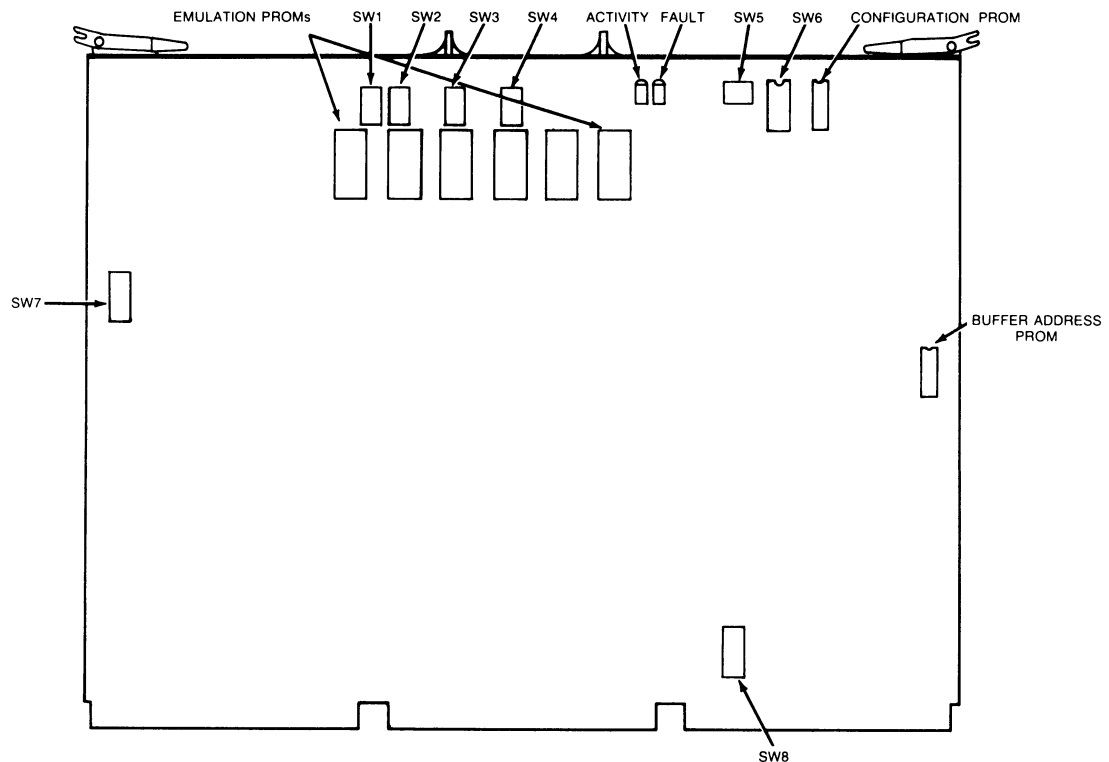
SC7000 Disk Controller PCBA, Component Locations
